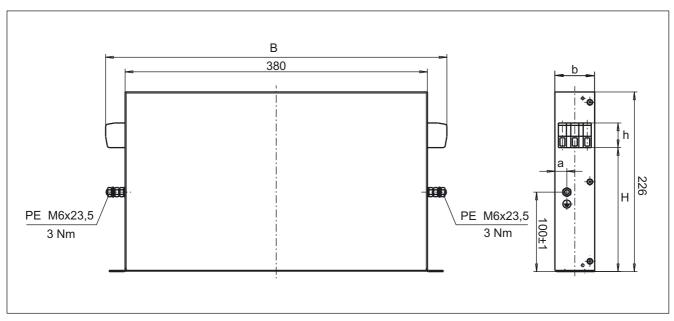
Dimension drawing: line filter for Smart Line Module (16 kW and 36 kW)
